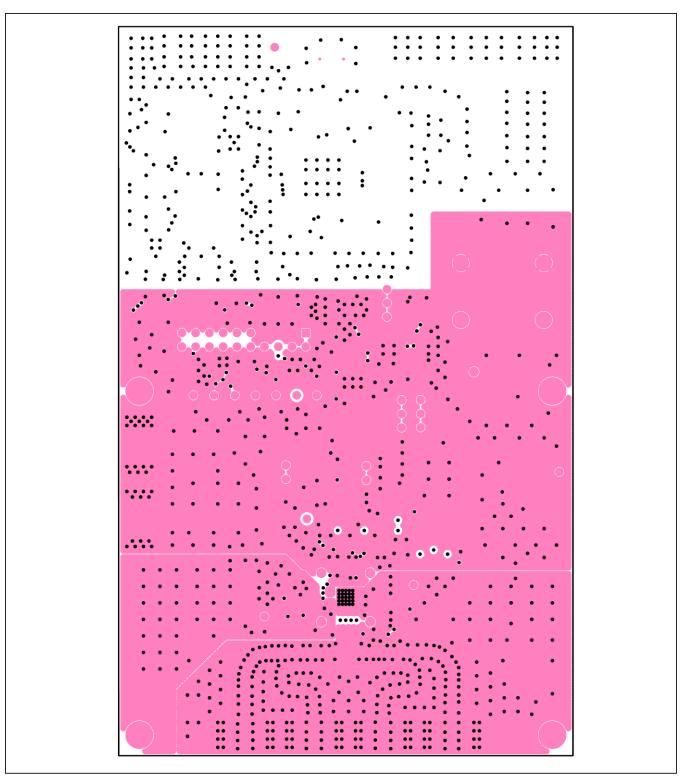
MAX2870/MAX2871 EV Kit PCB Layout—2nd Layer
